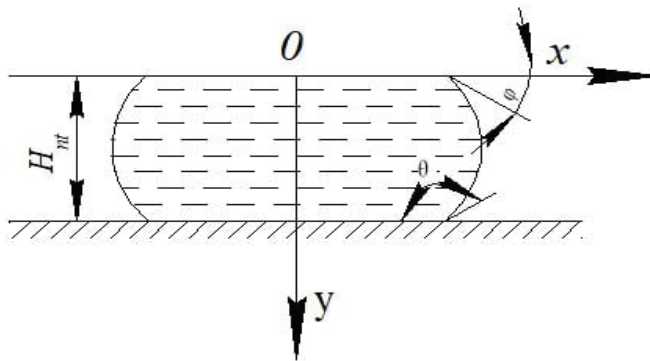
Scheme of the location of a solder drop on the surface of the soldered material.
